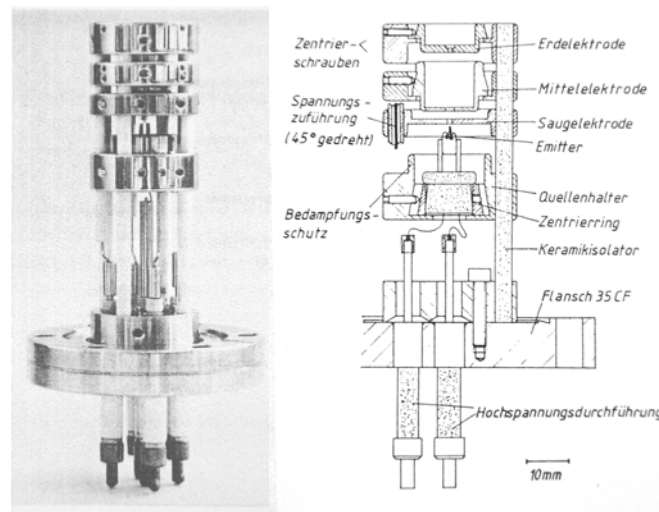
Gun lens design by Mayer which served as a model for the initial setup. a) Image of the assembled gun lens ready to be inserted into the housing. b) Schematic drawing of the assembly also showing the emitter base socket with two flexible wires for supplying the heating current. From top to bottom: (left side) centering screws, voltage supply (rotated through 45°), evaporation shield; (right side) ground electrode, focusing electrode, extractor electrode, emitter, emitter support, centering ring, ceramic insulator, flange CF35, high voltage feedthrough. Figures adapted from [51].
